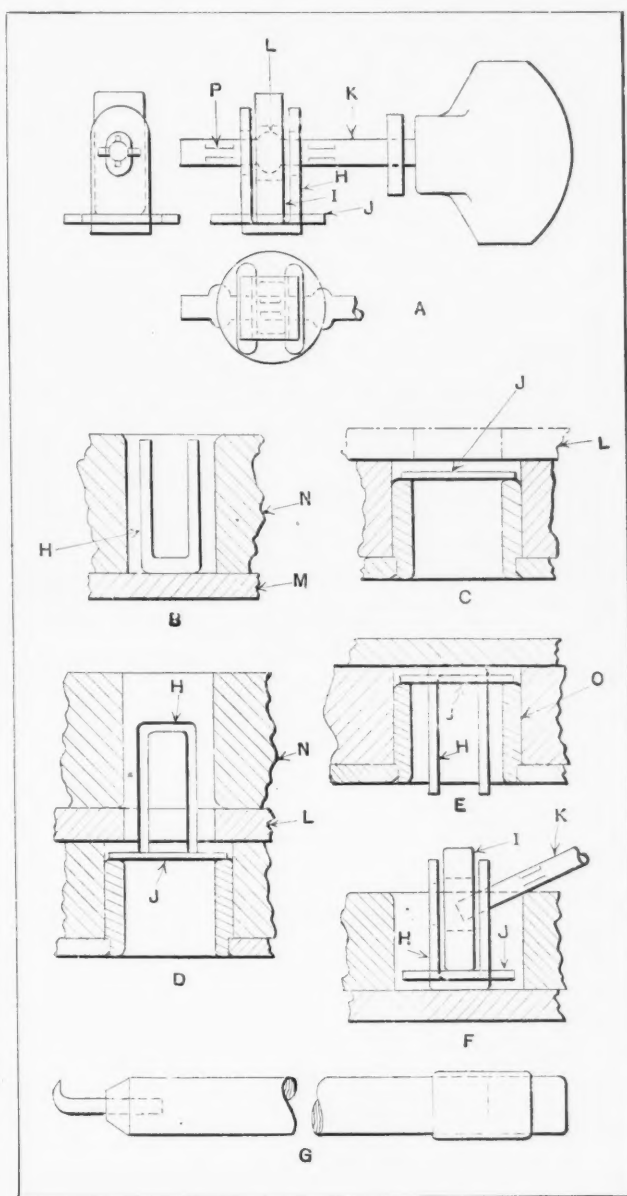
Switch Part Assembly, Enlarged Cross-section of Assembling Plates, and Tool for Handling U-shaped Pieces
